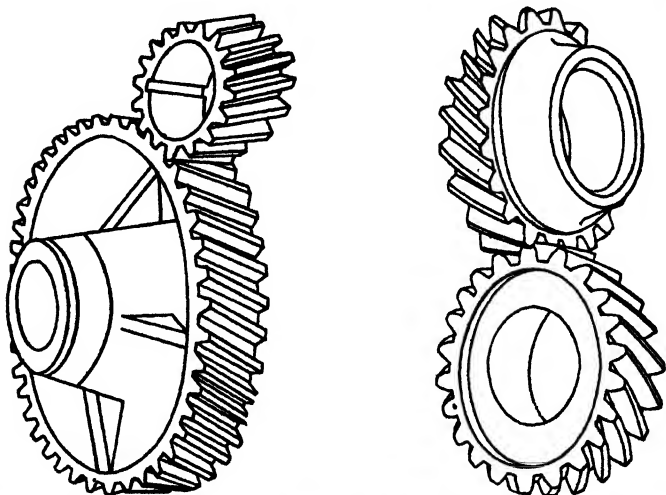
Helical gears. (a) A design of parallel helical gears used to connect parallel shafts. These are sometimes called *spiral gears*. (b) Crossed helical gears, a pair of helical gears used to connect two shafts that cross each other and whose axes are in different planes.
